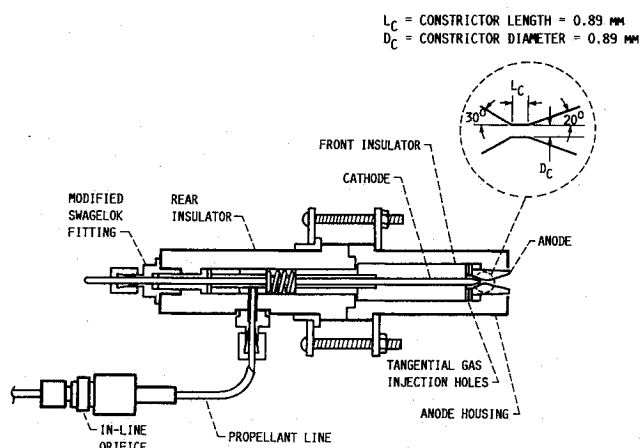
Cutaway view of arcjet thruster with anode dimensions described.
